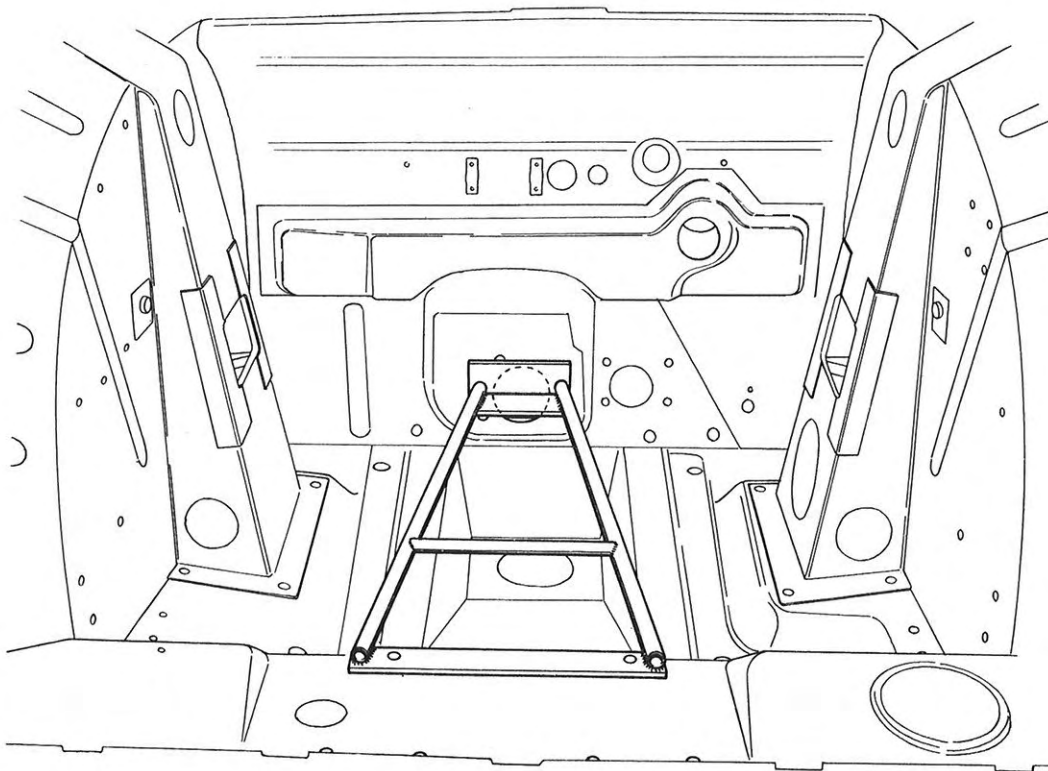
Checking dimensions of front floor. Tool Saab 93-152
